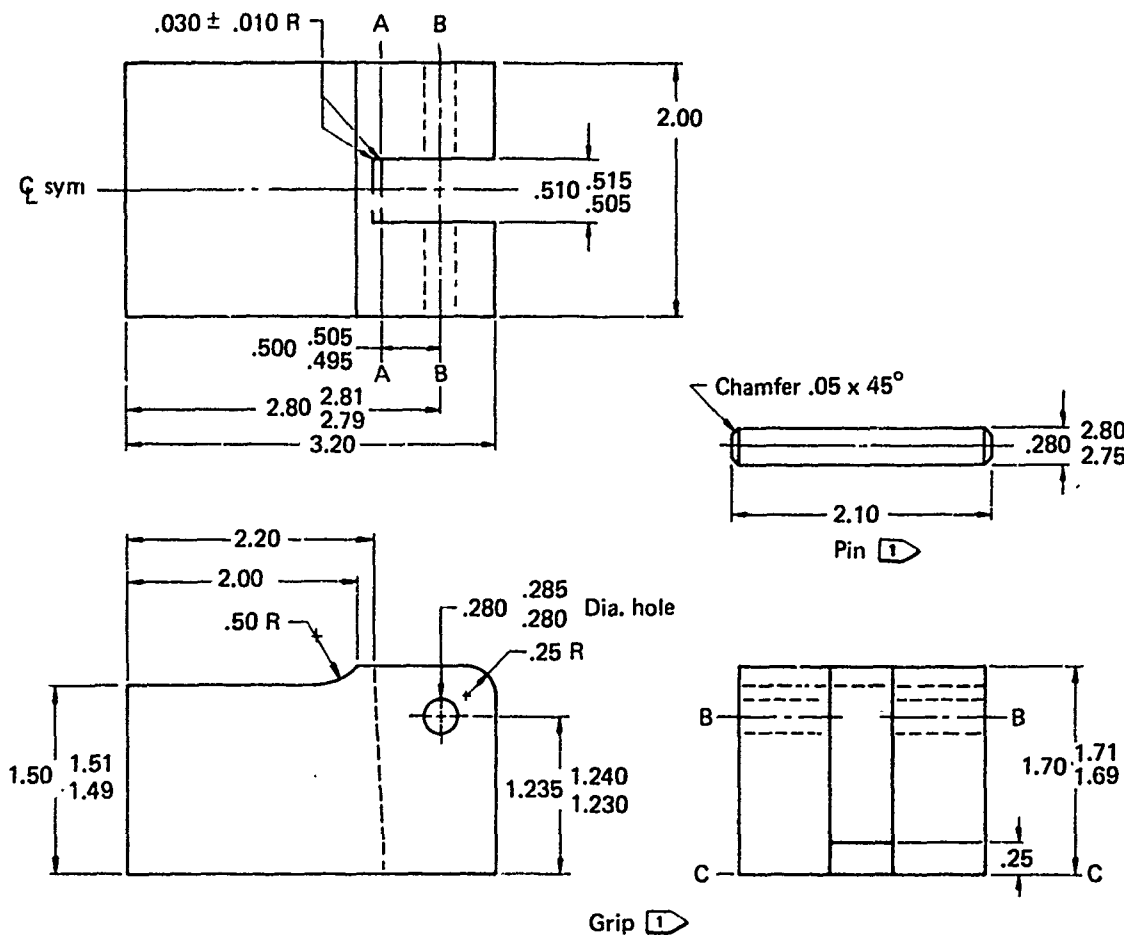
LOAD APPLICATION TO SHORT NOTCH BEND SPECIMEN
